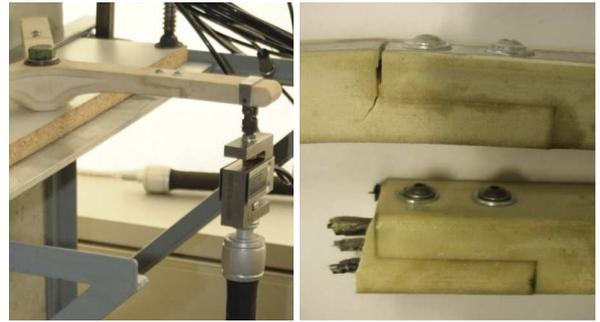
Breaking test stand with pulling actuator, force sensor and to test lever arm (left) and breaking test example (right).
